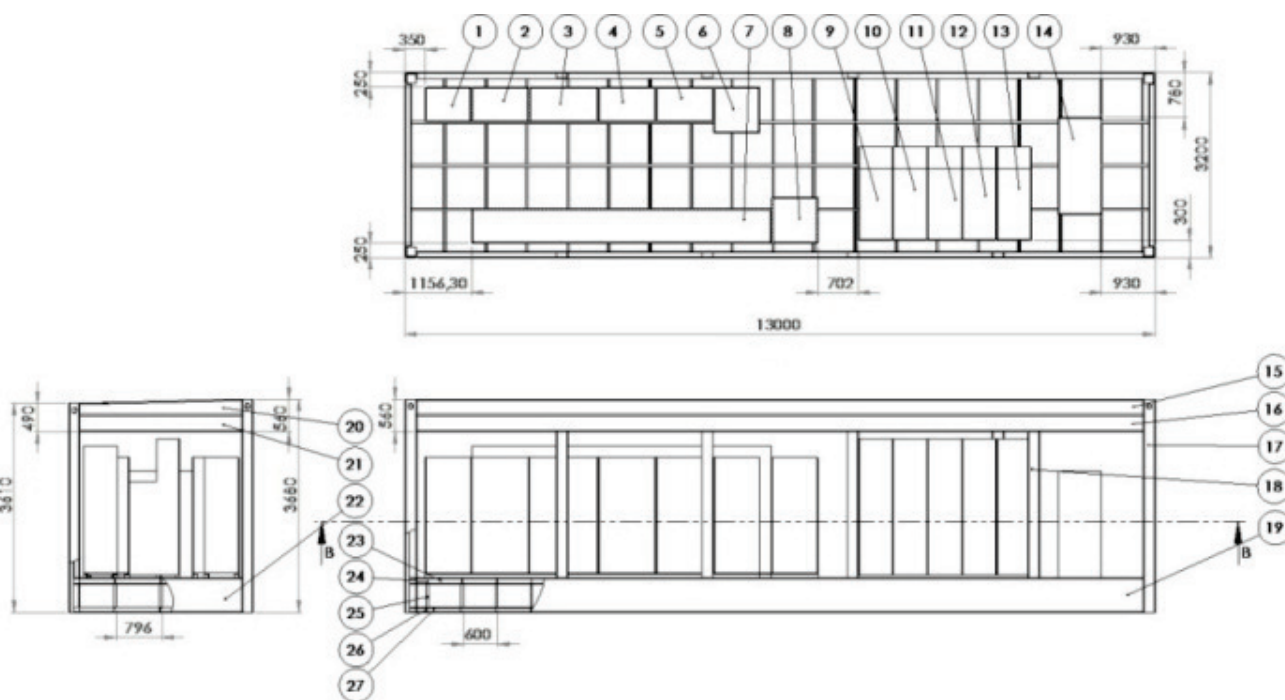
Positions of elements that cross the floor of a loaded container and their weight.
